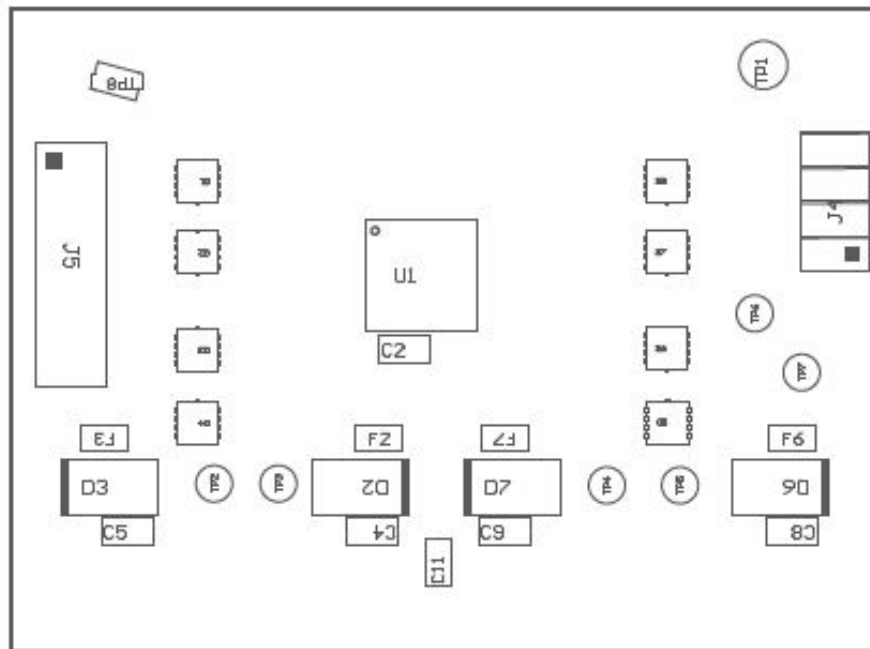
TPS23880EVM-008 (Daughterboard) Top Side Assembly
